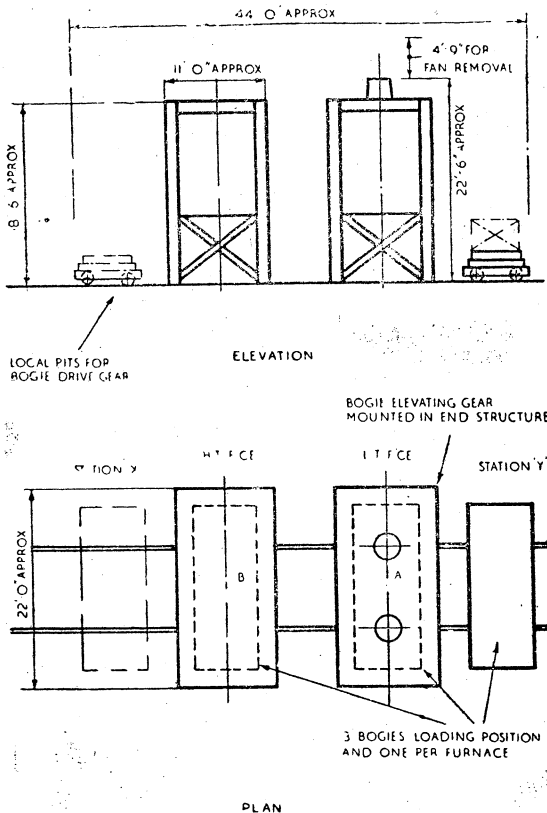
DIAGRAMMATIC PLAN AND ELEVATION OF TWO-FURNACE BLACKHEART INSTALLATION.
